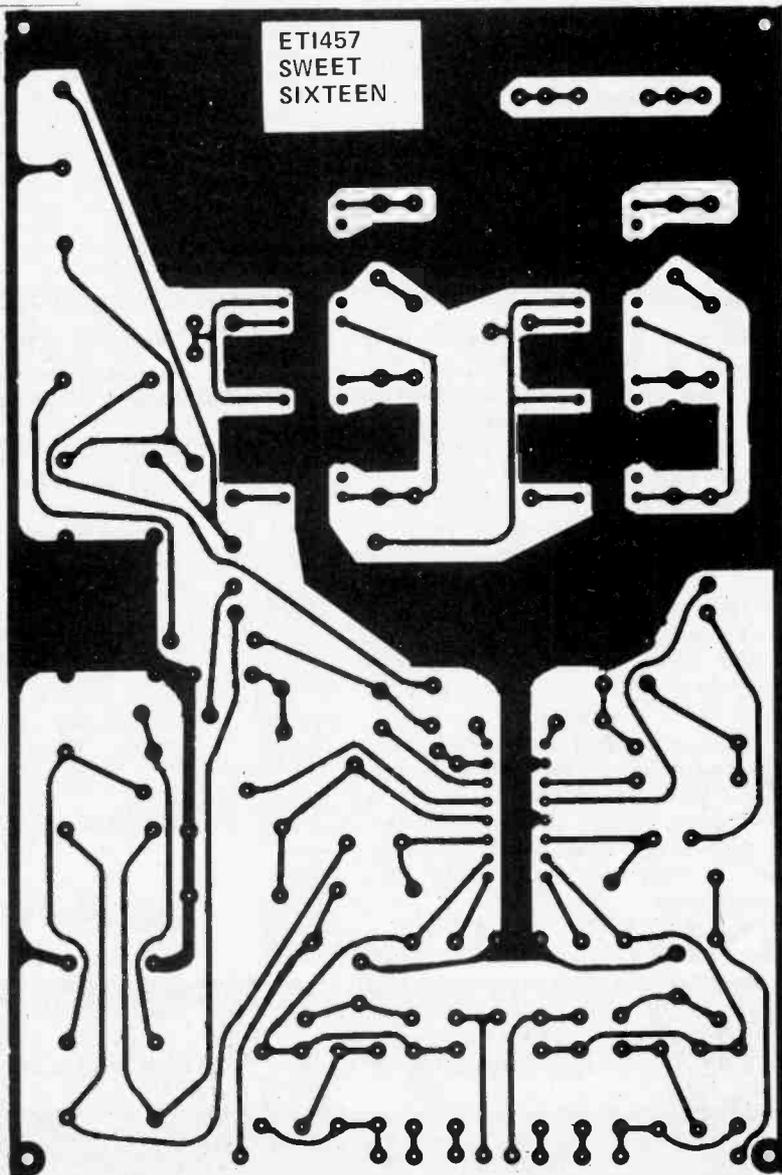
The P.C.B. design shown full size (6in x 4in).
